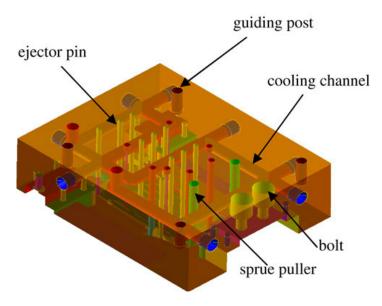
Space available for cooling channels layout in a mould (Li and Li, 2008)
